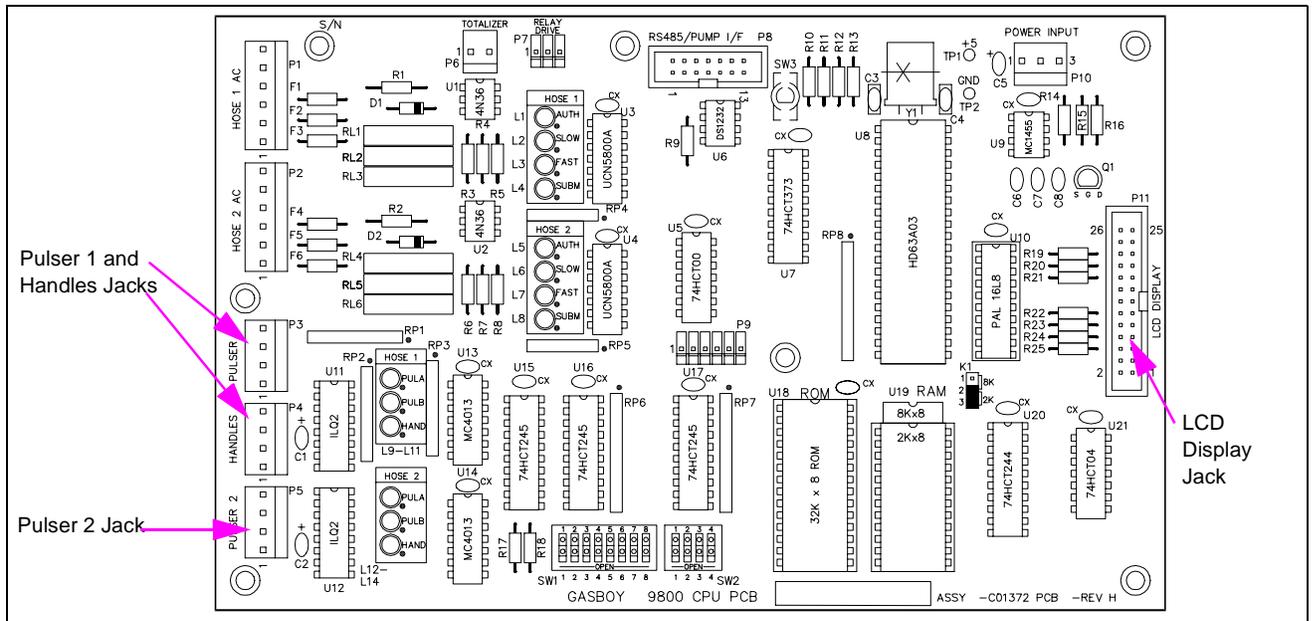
C06391 9800 CPU Printed Circuit Board (Drawing)
